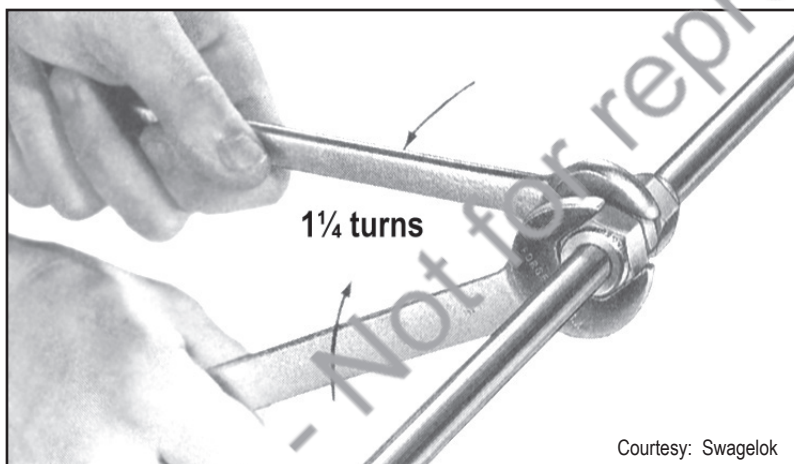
F: Example of using back-up wrench on fitting make-up.
